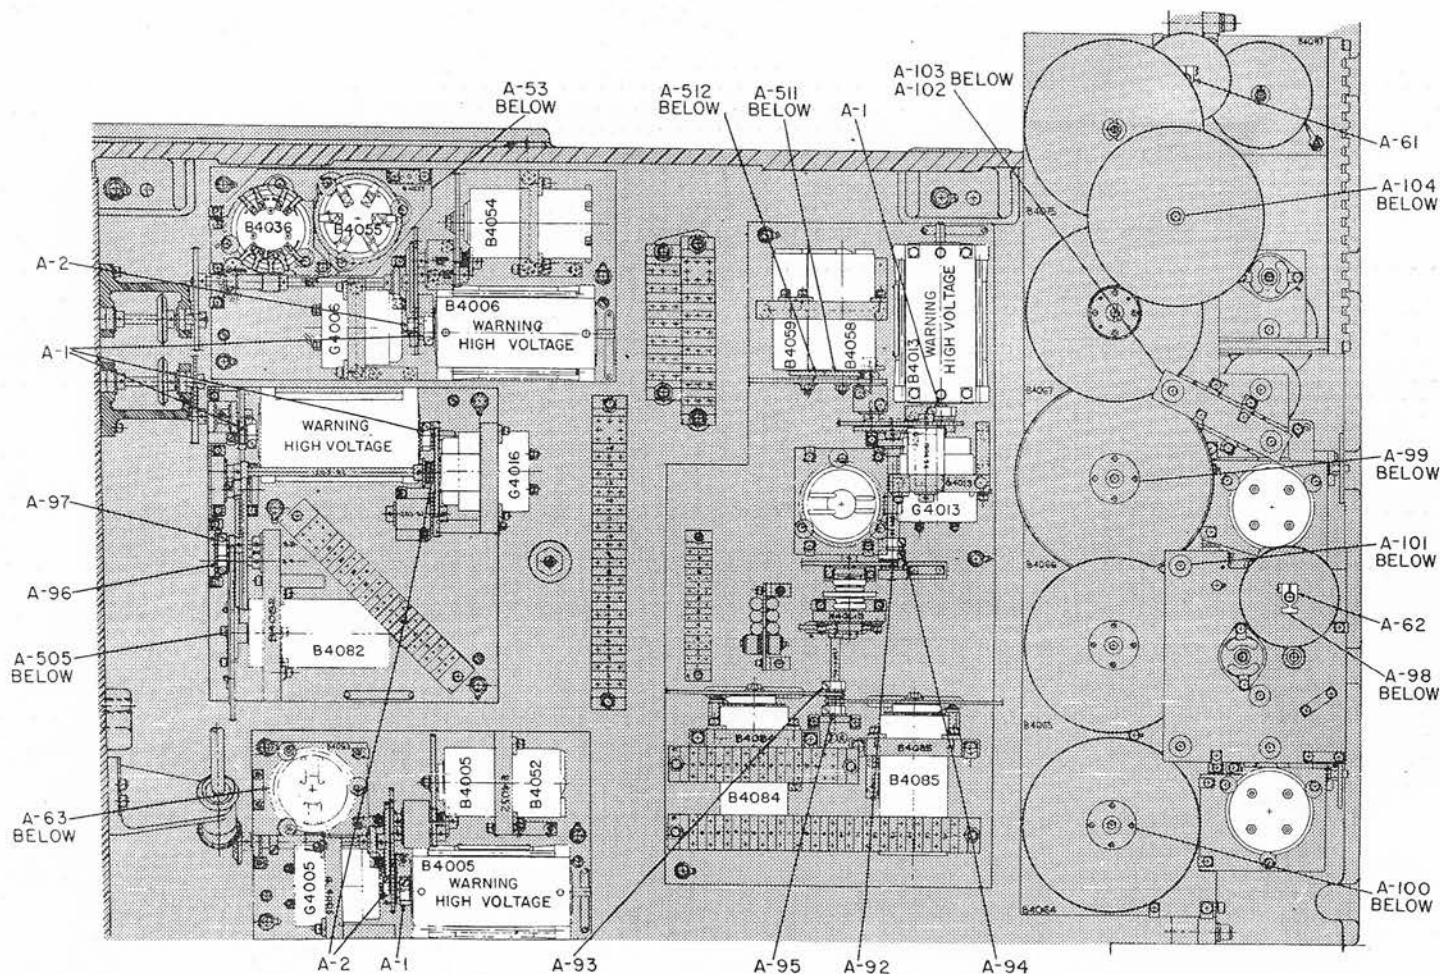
Mechanical Section Left Wall as Viewed from Right Side
